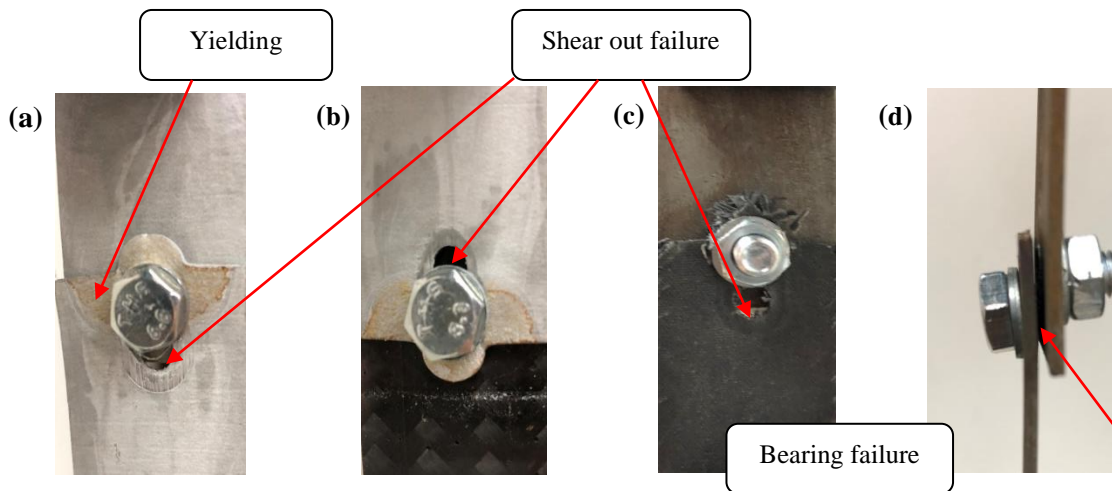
Failure mechanism of bolted joint for corroded specimens, (a) Al/Al, (b) Al/CFRP, (c) steel/CFRP, (d) steel/steel.
